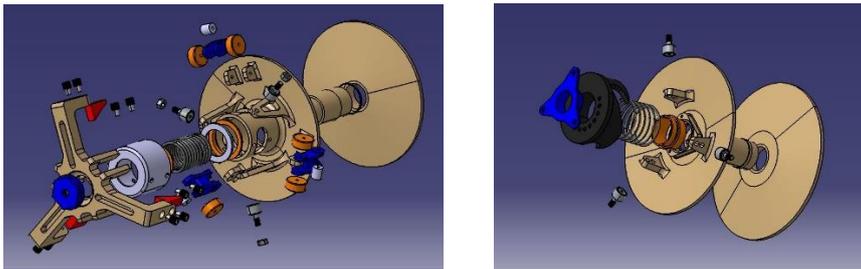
(a) and (b) depicts the exploded view of the drive and driven pulley of the designed continuously variable transmission respectively.
